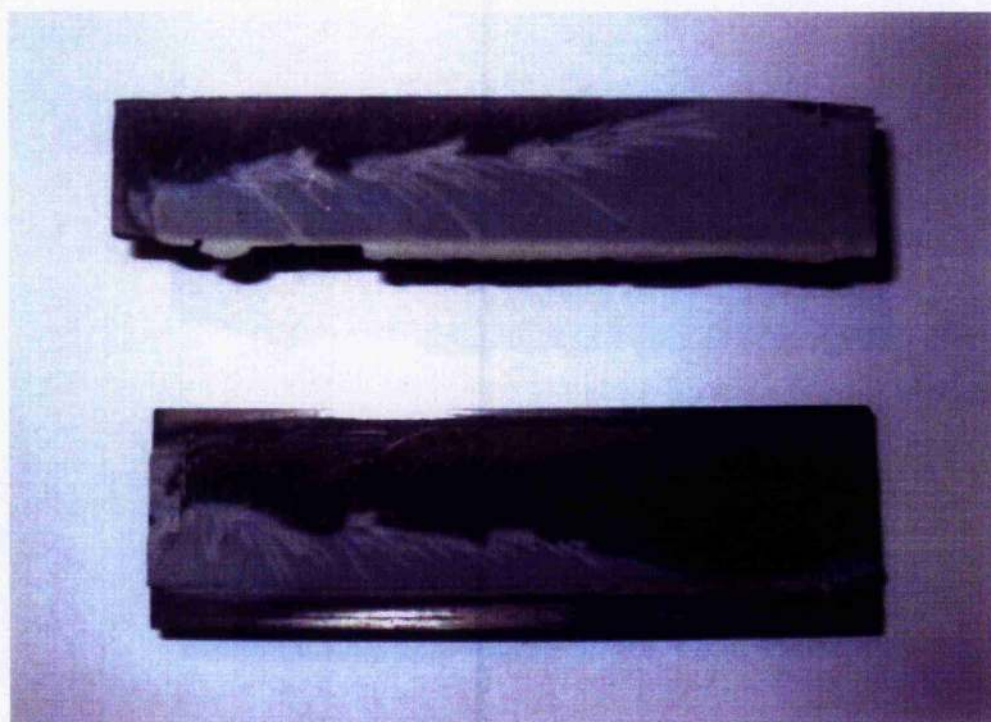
Fractured surfaces of standard steel/steel 75mm T bonded beam specimens.
